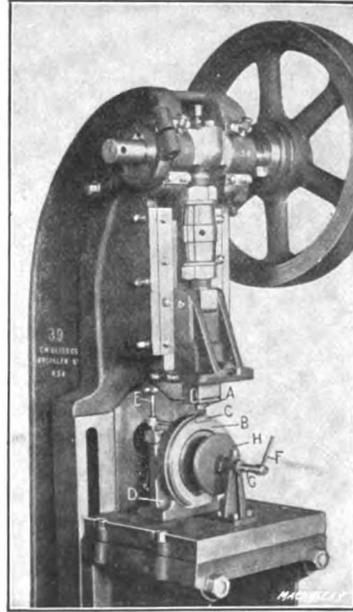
Perforating Attachment with Special Device for Holding Shell in Place
